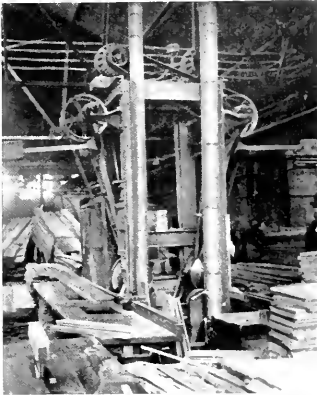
A NOVEL METHOD OF MOUNTING TWO SWING SAWS AND DRIVING MOTORS
